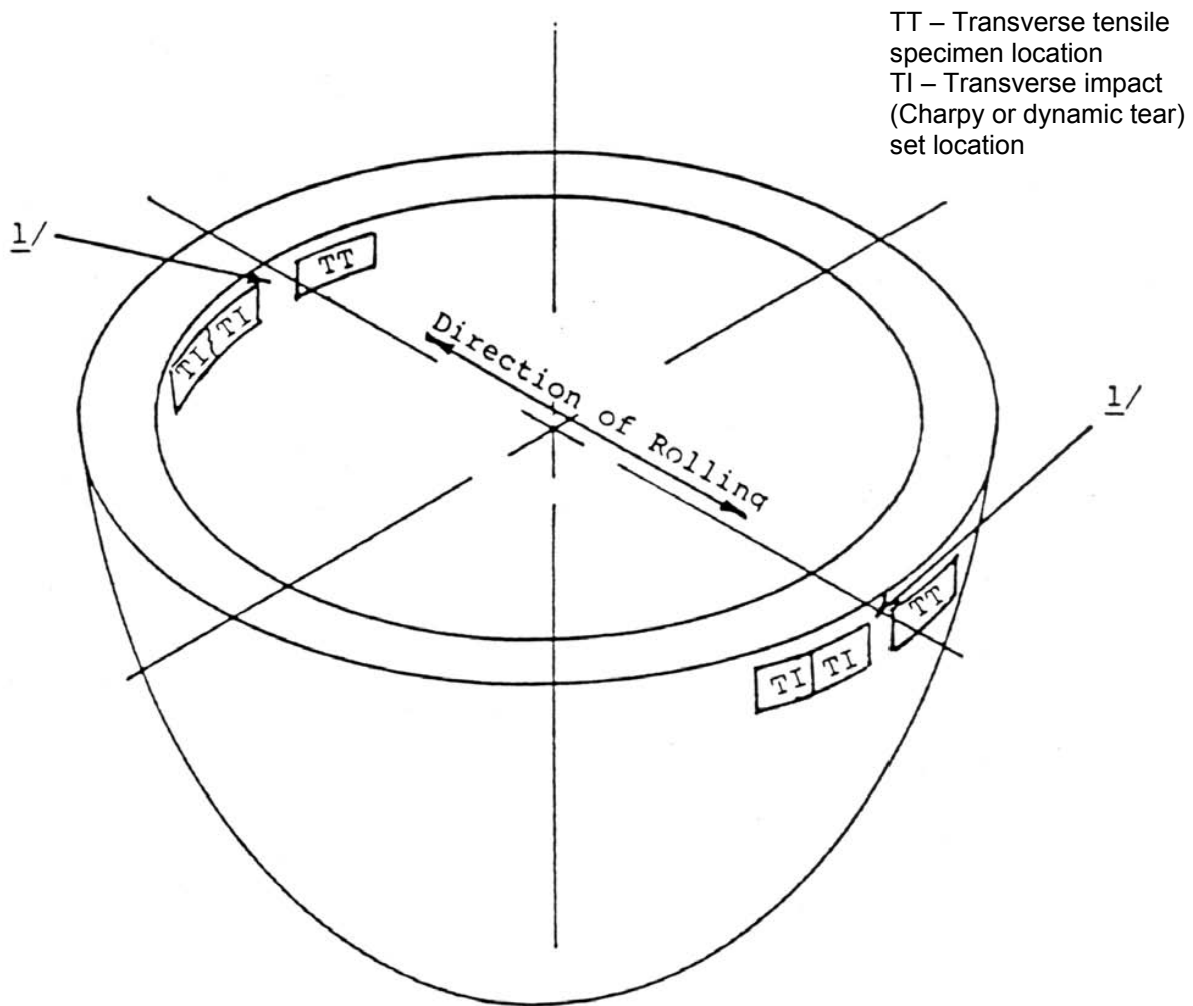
One-Piece Head Up to 48 Inches (1219 mm) od, Inclusive – Test Layout.
